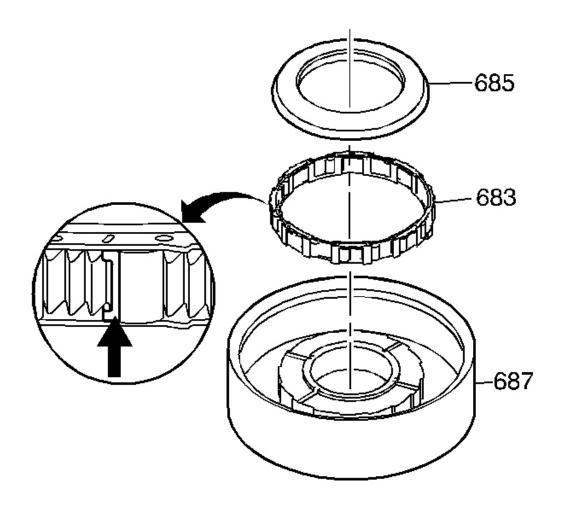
Expanded View Of 1-2 Clutch Roller Assembly Courtesy of GENERAL MOTORS CORP.
